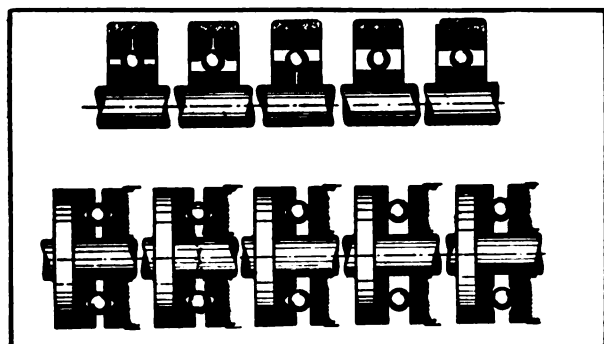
Various Types of Ball Bearings—Those in the Top Row Are Journal Bearings and in the Bottom Thrust Bearings.
